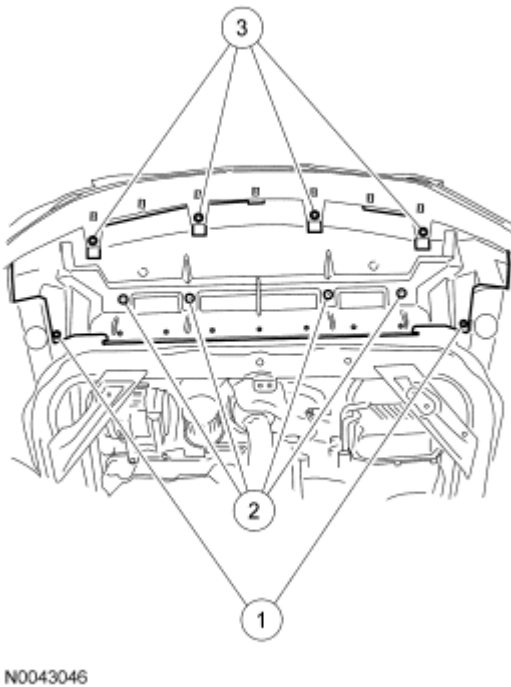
Identifying Front Splash Shield Screws, Bolts And Retainers
